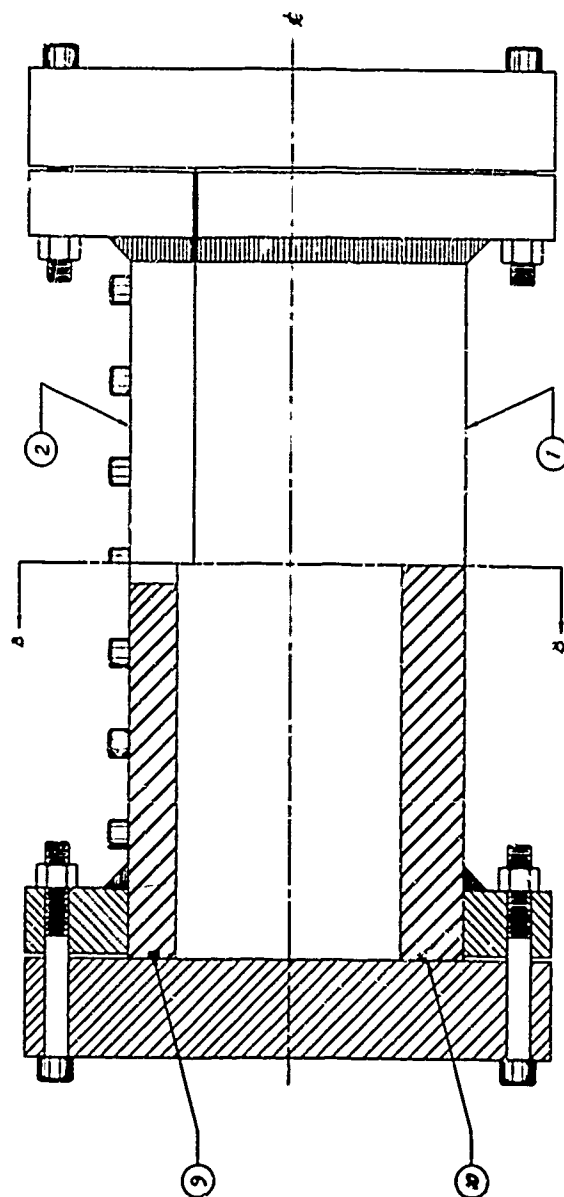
DESIGN OF DRIVEN PRESSURE TEST SECTION
